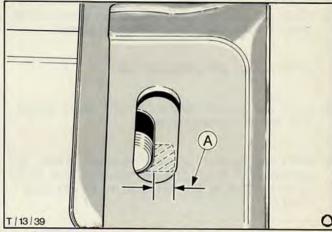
Mark horizontal displacement position of steering shaft. Rework belt rail to a maximum of 4 mm.
